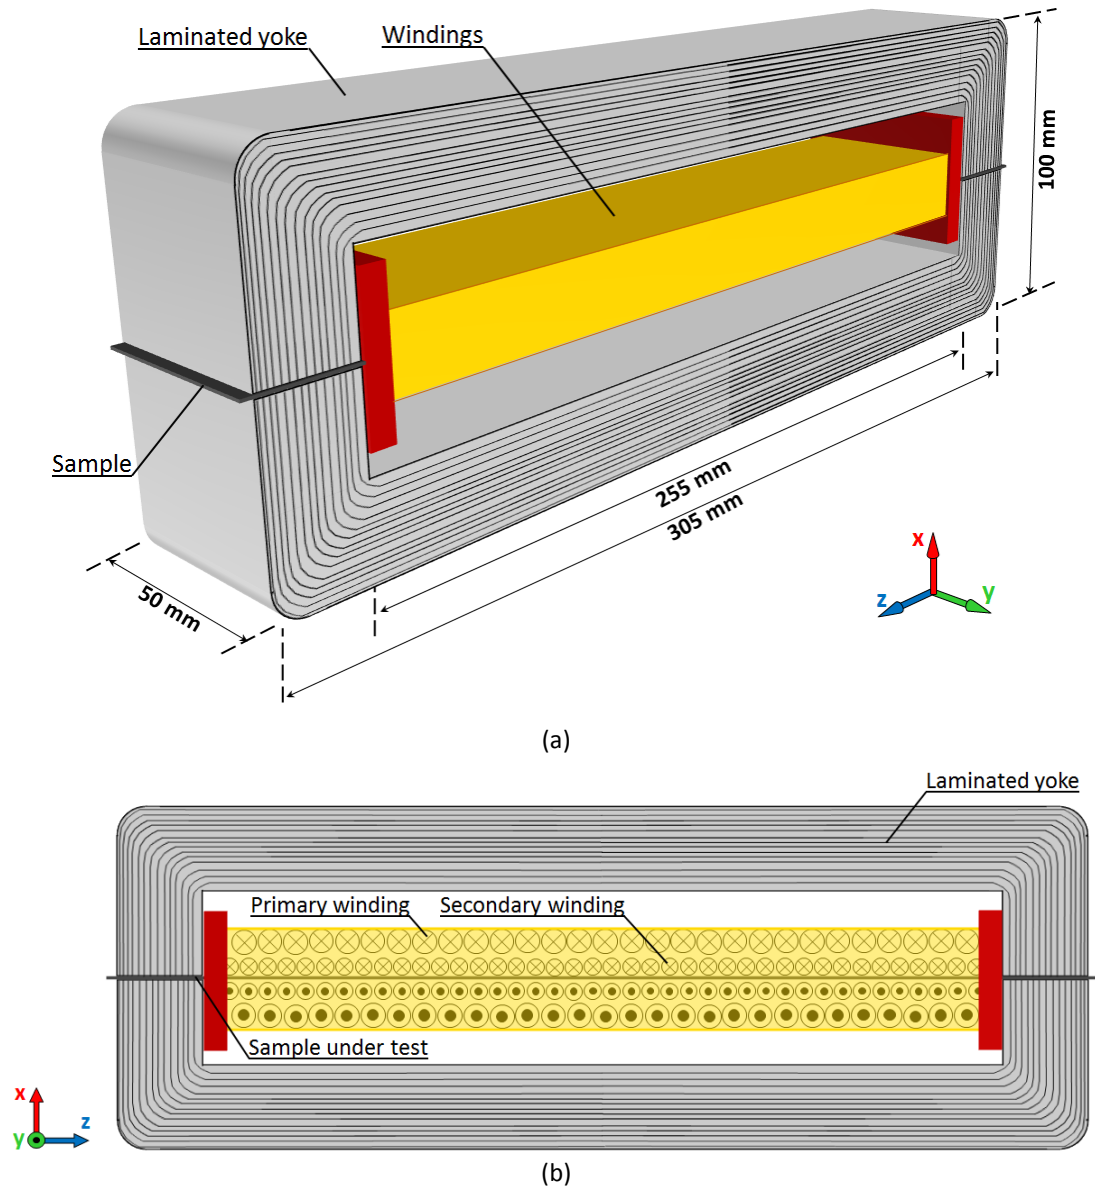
Single strip tester (a) perspective view showing physical dimensions, and (b) side view
